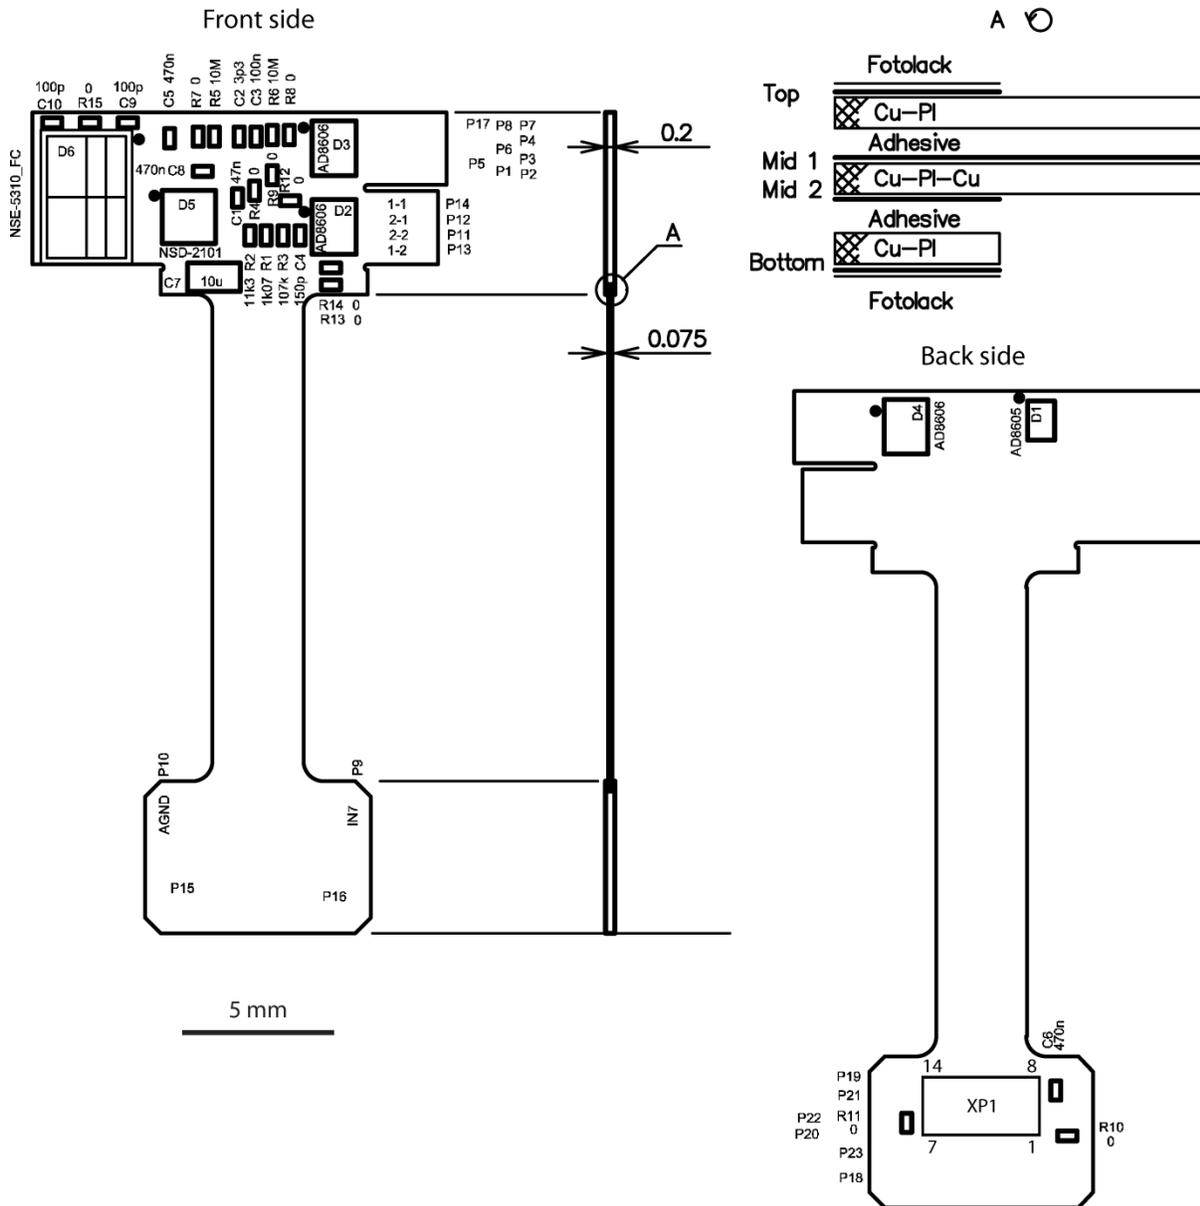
Placement of components on the microdrive board. All passive components have form factor 0201 except the 10 μ F capacitor C7 that has form factor 0603.
